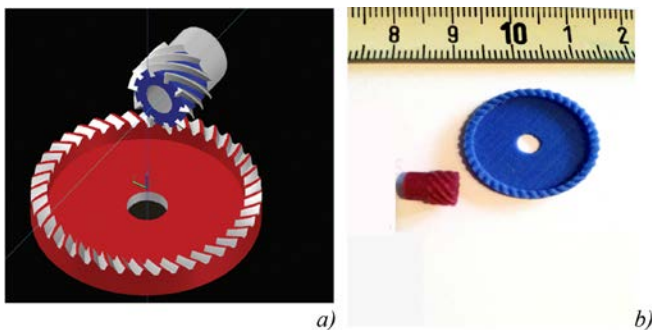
Helicon gear drive with offset 4 mm, gear ratio 40/10 (axial module 0.5 mm): a) 3D CAD model; b) 3D printed model (the shown scale is in mm)
